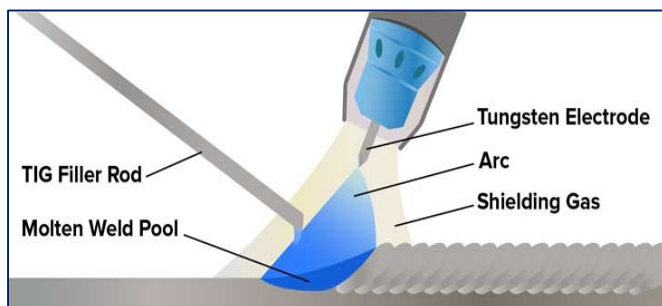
Schematic Diagram of TIG Welding System [27]
